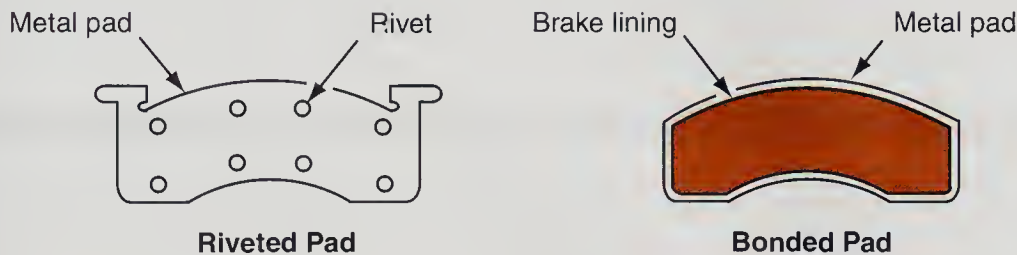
The friction material of a disc brake pad is bonded or riveted to the metal pad.
